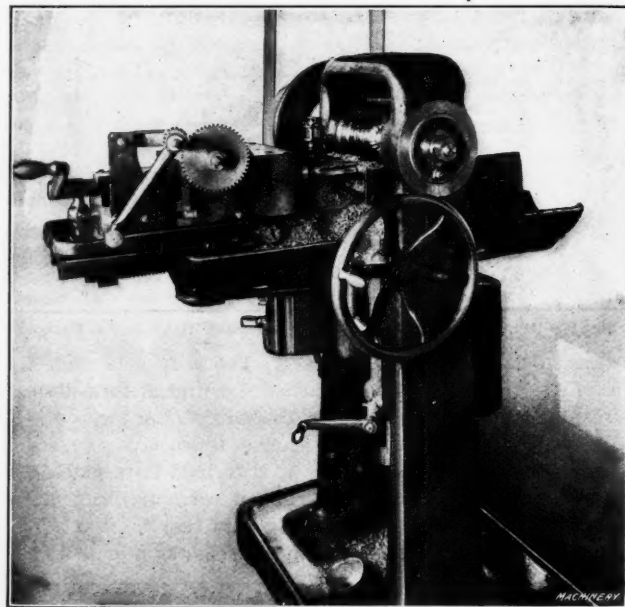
Showing the Limitation of Chip Room on Table of Late Design of Manufacturing Milling Machine
